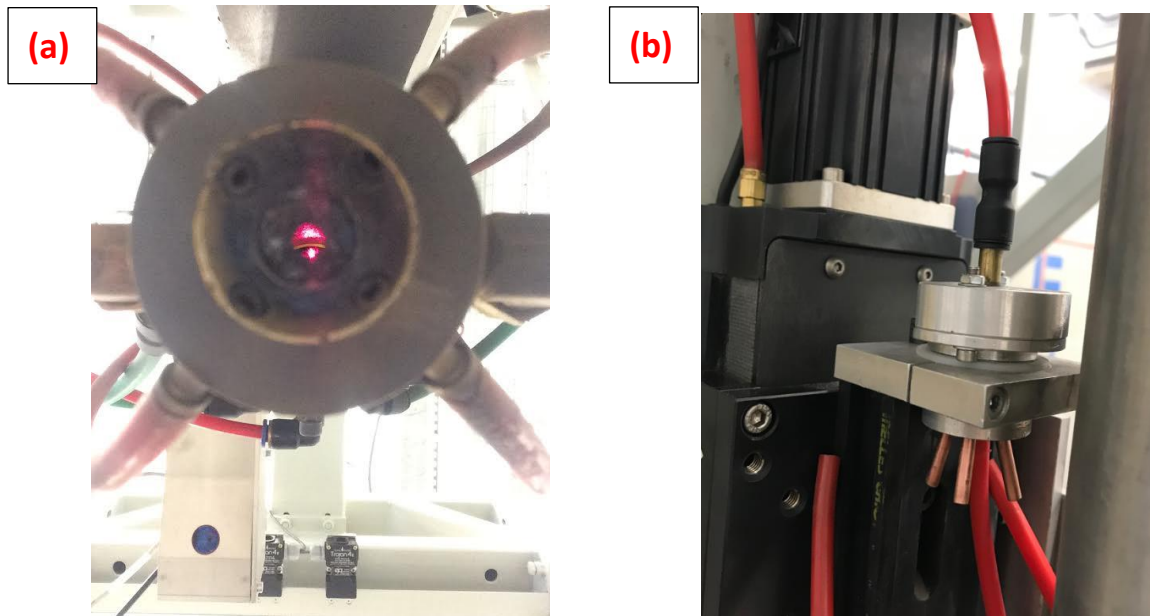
(a) Top-view of nozzle head, (b) Splitter insert dividing powers into 4 pipes uniformly.
